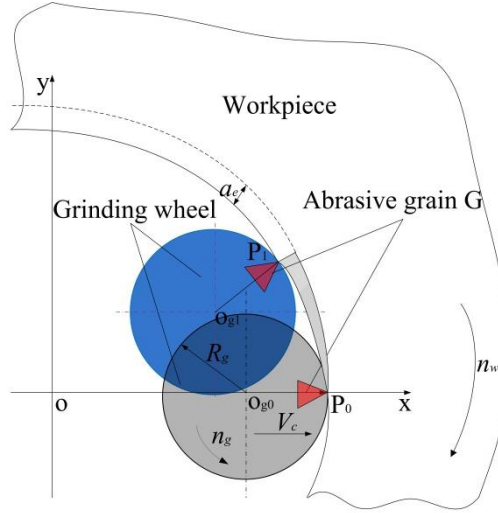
Relative motion between the grinding wheel and the workpiece.
